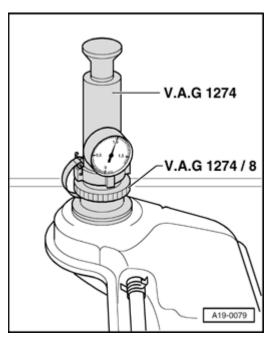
Attaching VAG1274 Cooling System Tester Together With VAG1274/8 Adapter To Coolant Expansion Tank
